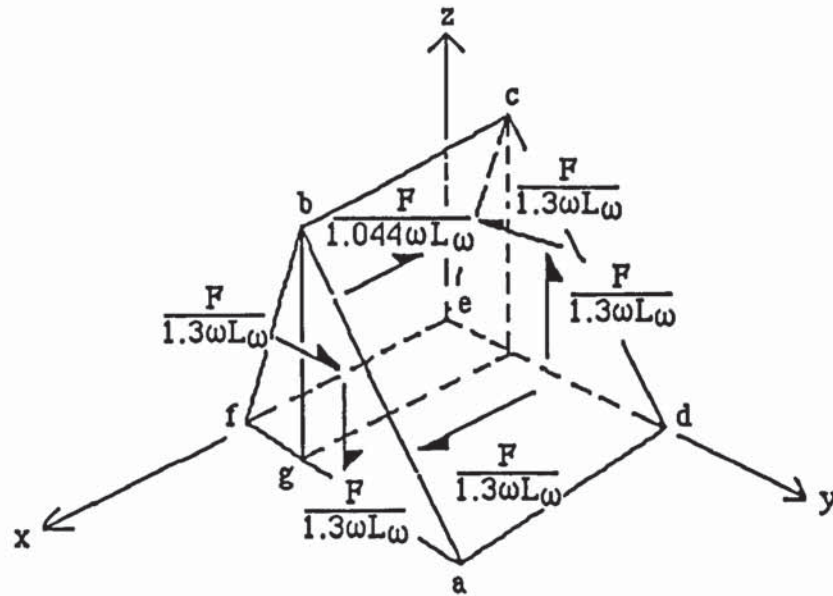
Stresses acting on longitudinal shear fillet weld abcdef.
